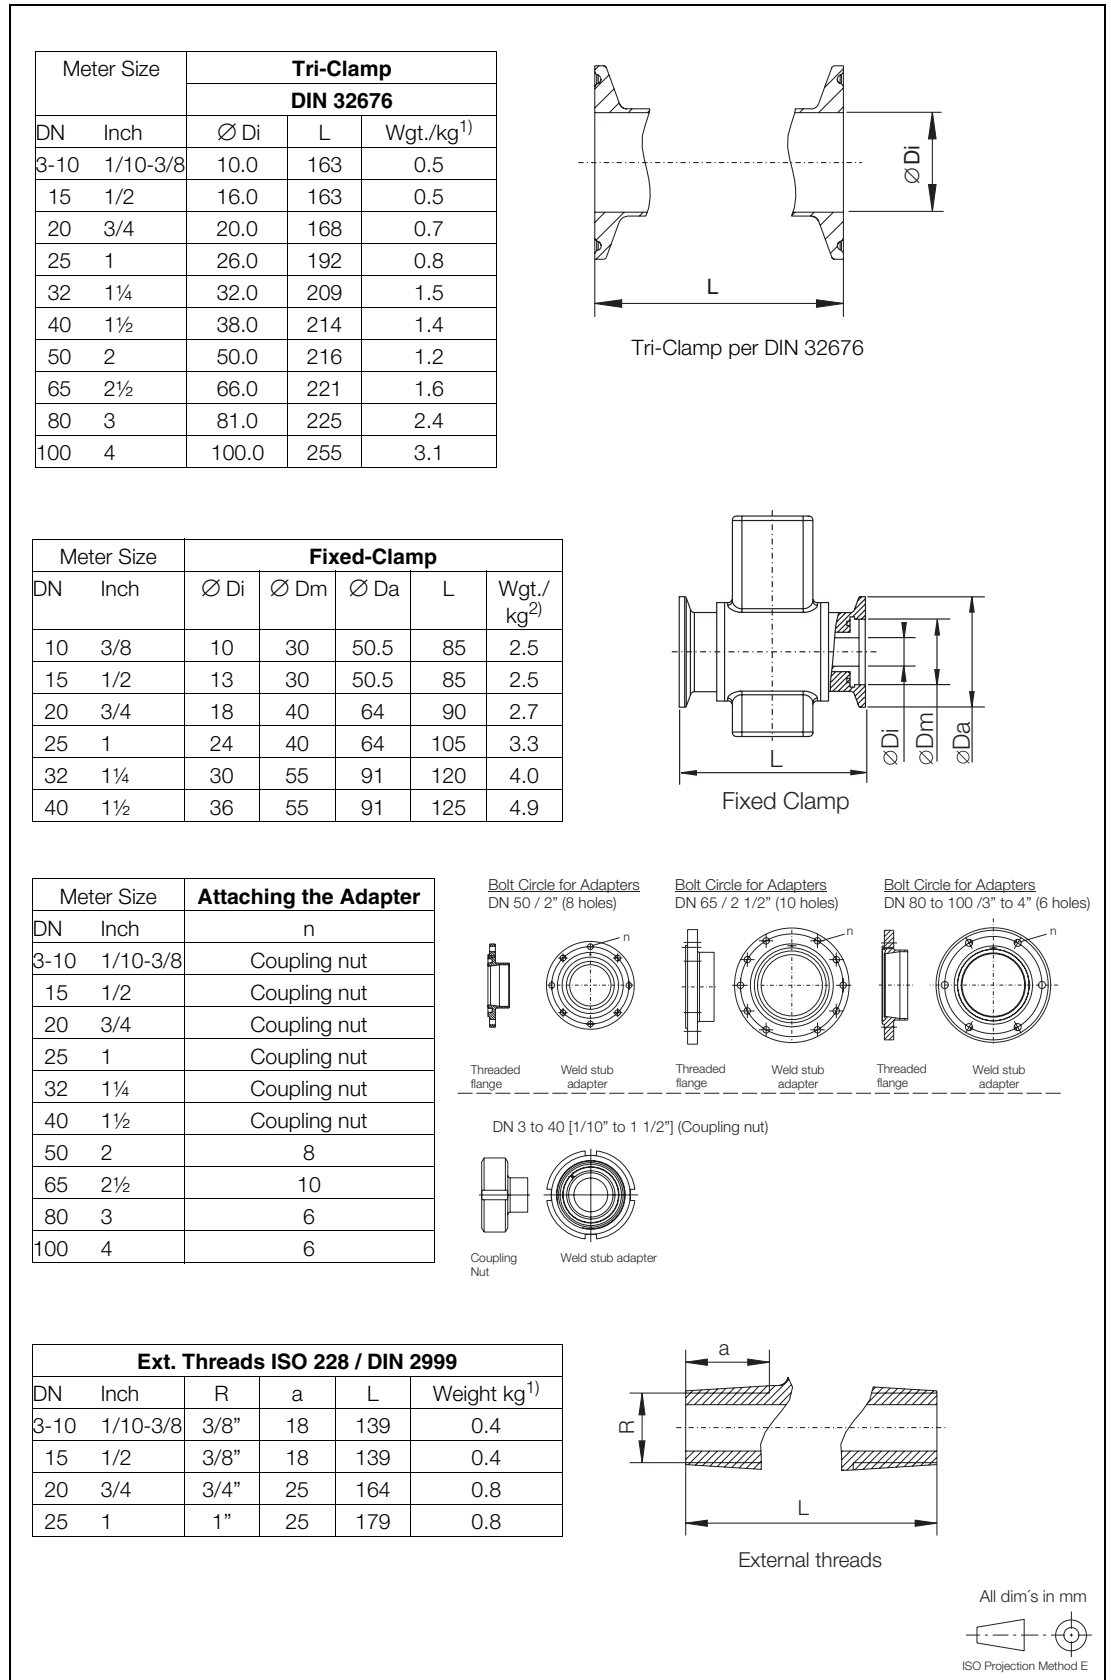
Dimension Drawing, DN 3-100 [1/10"-4"], Adapters for Variable Process Connections
